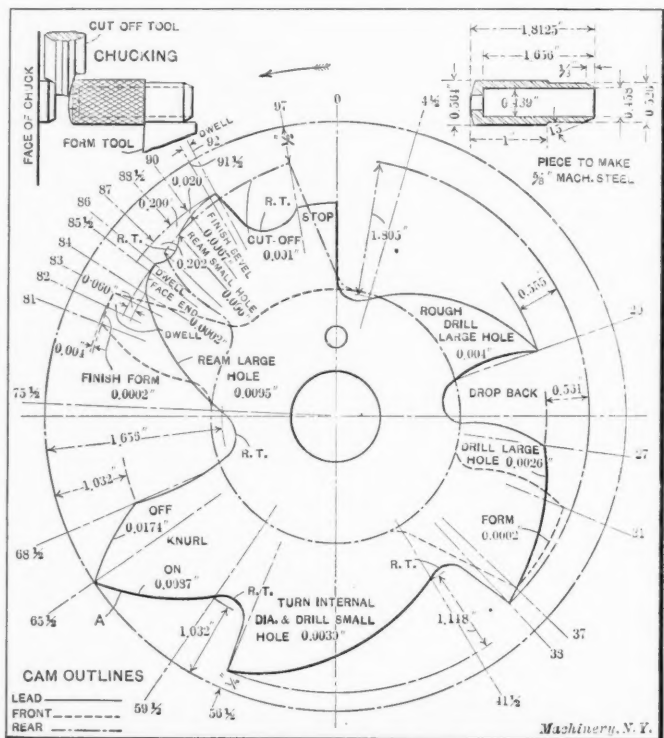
Cams for Making Brown & Sharpe Micrometer Sleeve, showing method of Laying out Lobe for Turret Knurling
